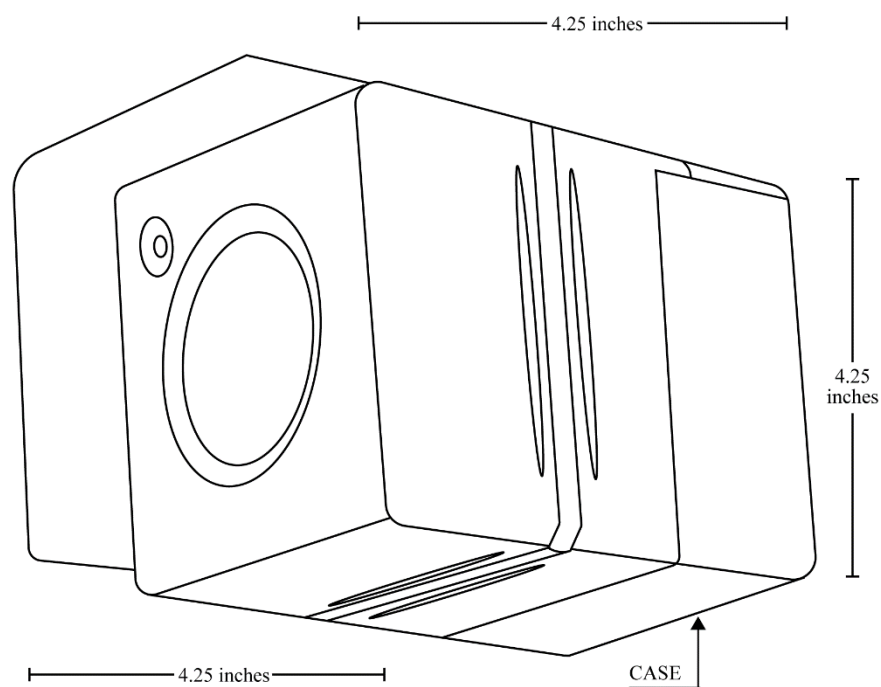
Bomblet, 4.25-inch, Cube, E123 - Line Drawing
